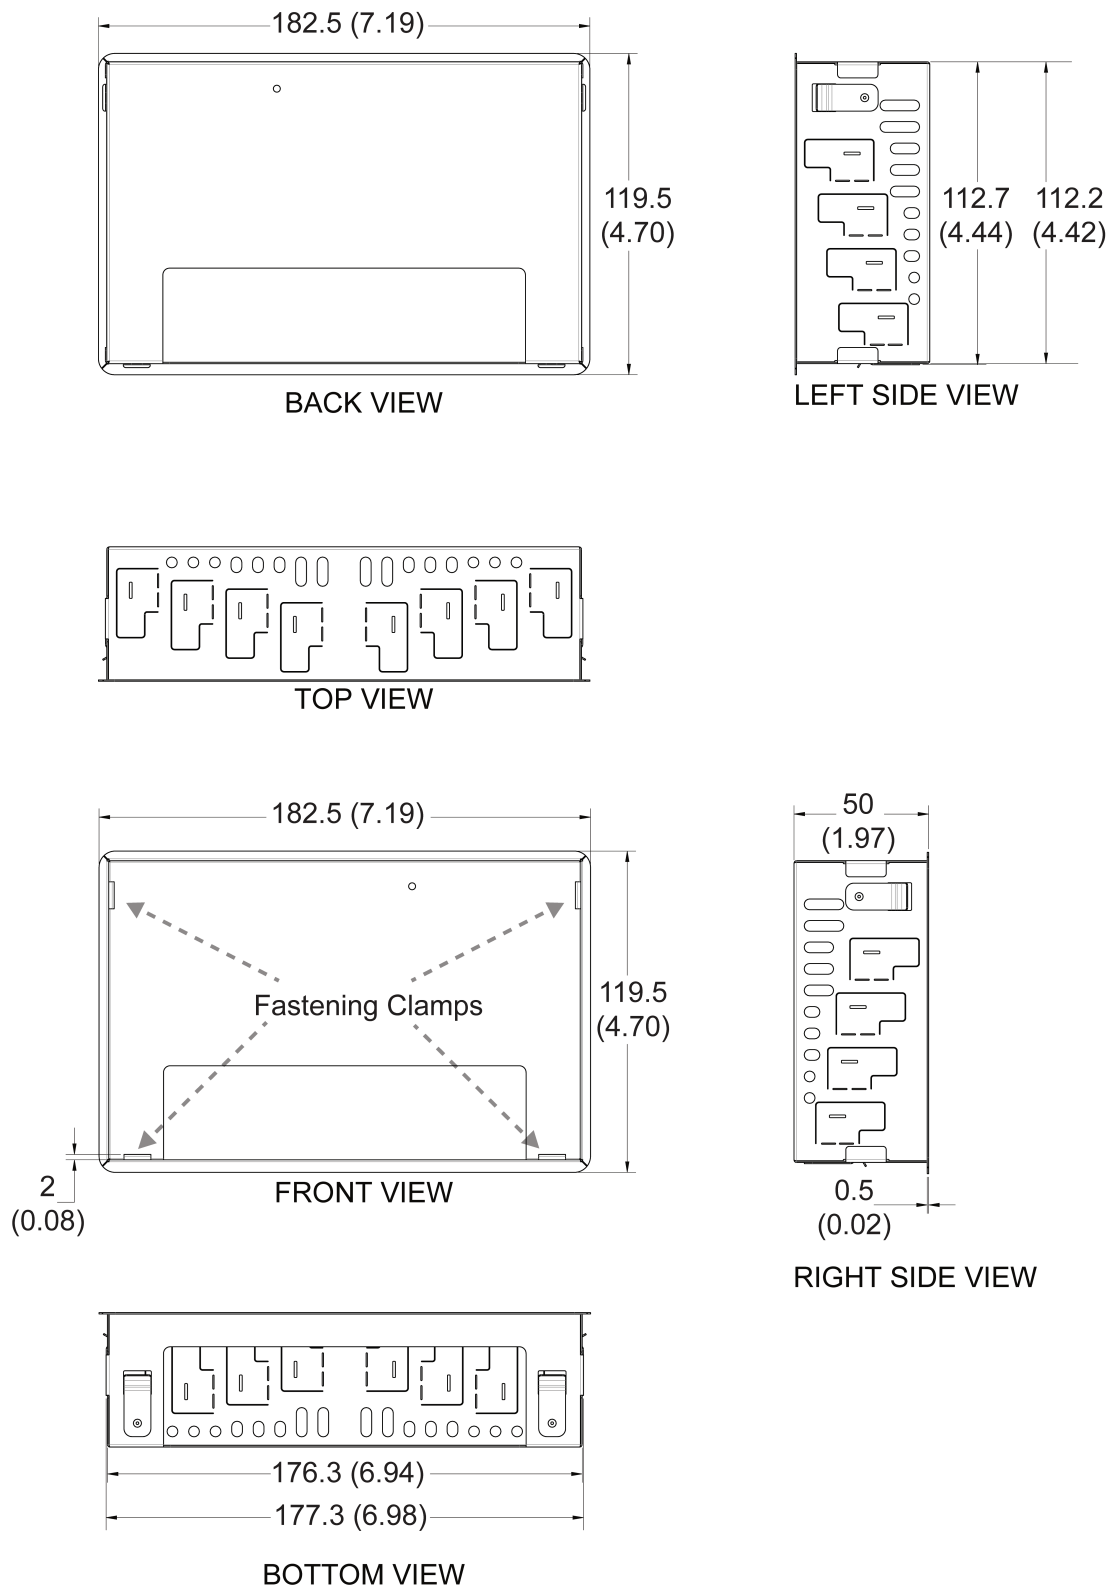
HORIZON-C7 Wall Mounting Kit dimensions
